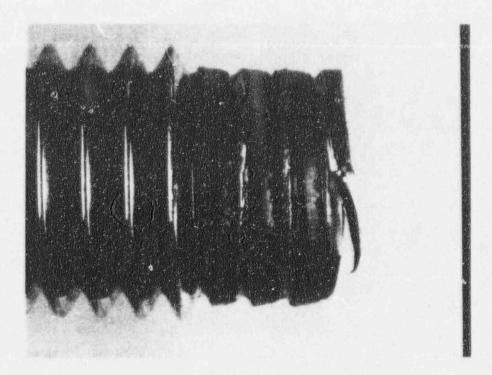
Close ups view of stripped Threads 4 Threads engaged
